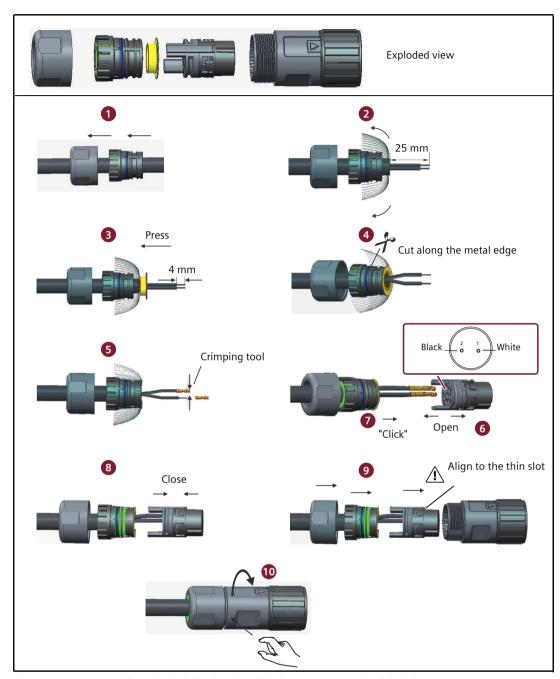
Assembling the holding brake cable the 1FL2 motor shaft height 45, 65, or 90
